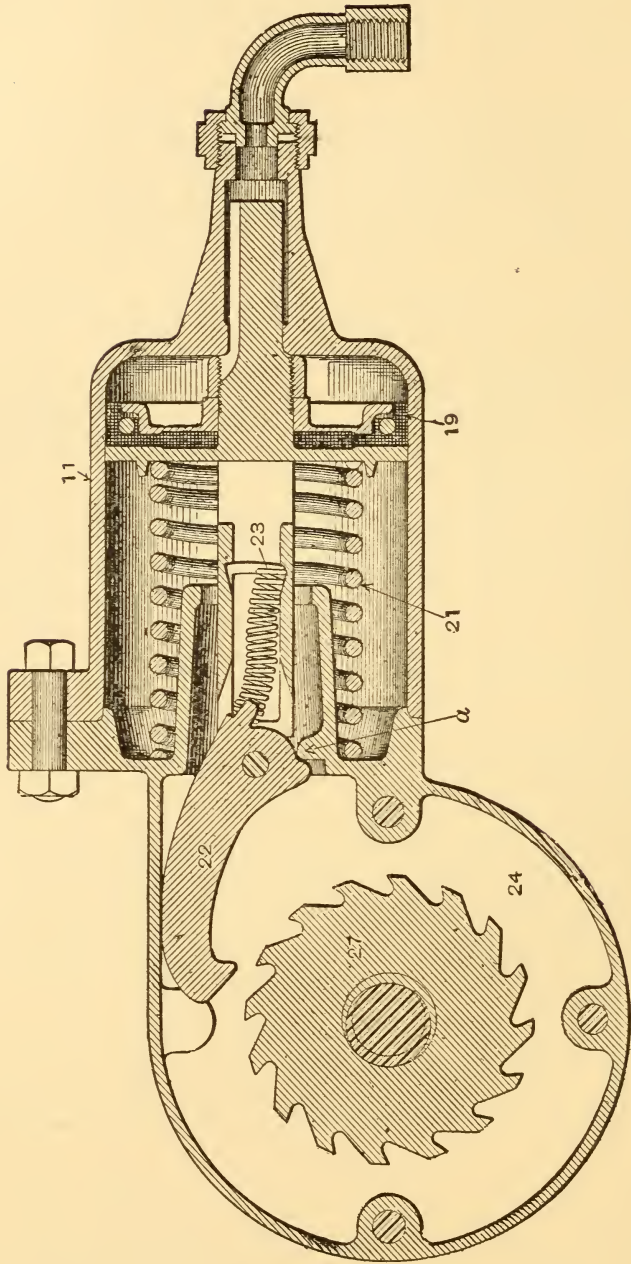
SECTIONAL, END VIEW OF AMERICAN AUTOMATIC BRAKE SLACK ADJUSTER.
